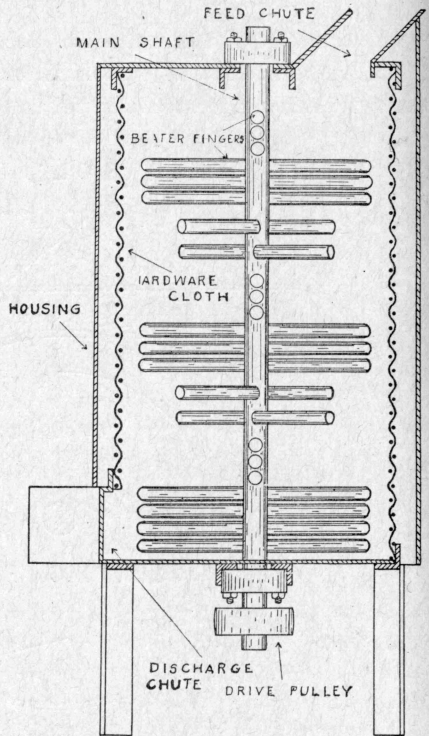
Cross-section of the Texas Station Cylinder Cleaner, showing the various parts of the machine.
